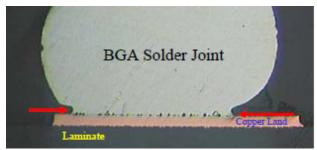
A Cross-sectional View of Planar Microvoids in a BGA Solder Joint
